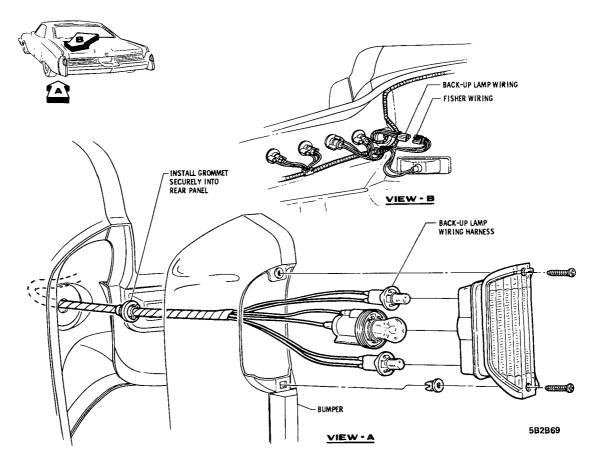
B-69 C Series Rear Bumper Back-Up Lamp
